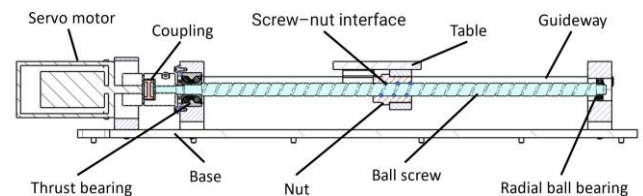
Schematic diagram of the exemplary ball-screw drive system used in sliding system of machining centres
